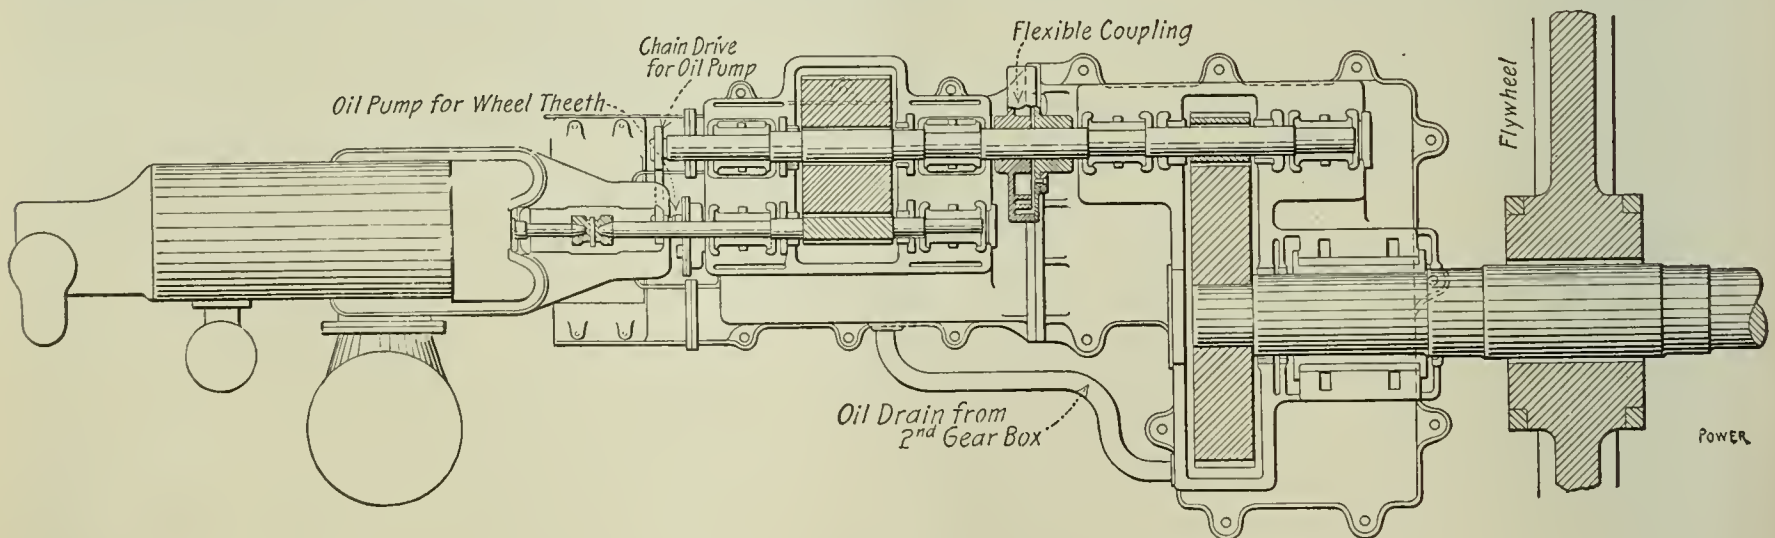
GENERAL ARRANGEMENT OF THE GEARS
